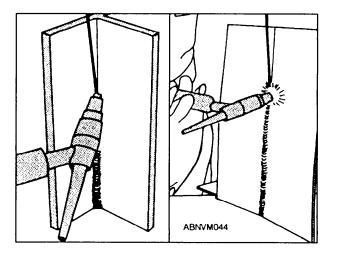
Butt and fillet welds made in the vertical position.
